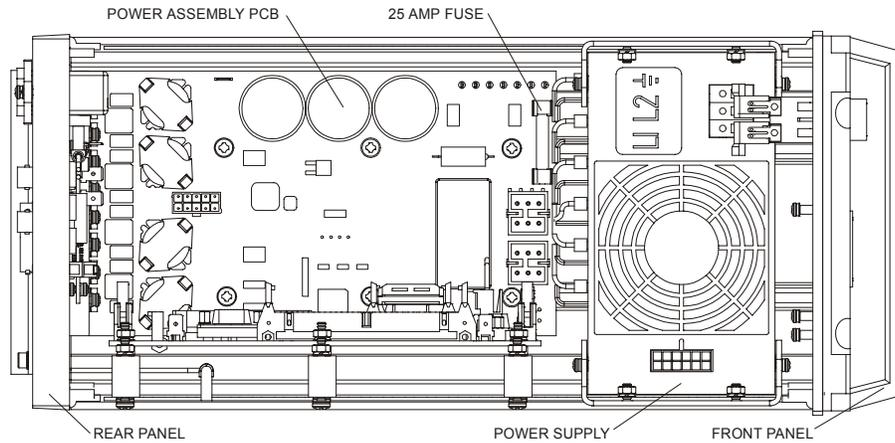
Electronic Chassis (Right View - Looking Toward the Power Interface PCB)
